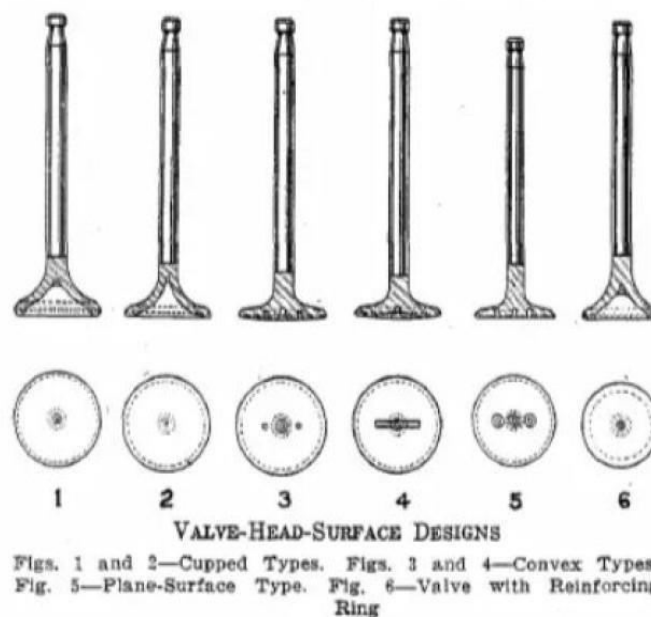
Valve head designs (From Bissell & Williams 1929, 179)
